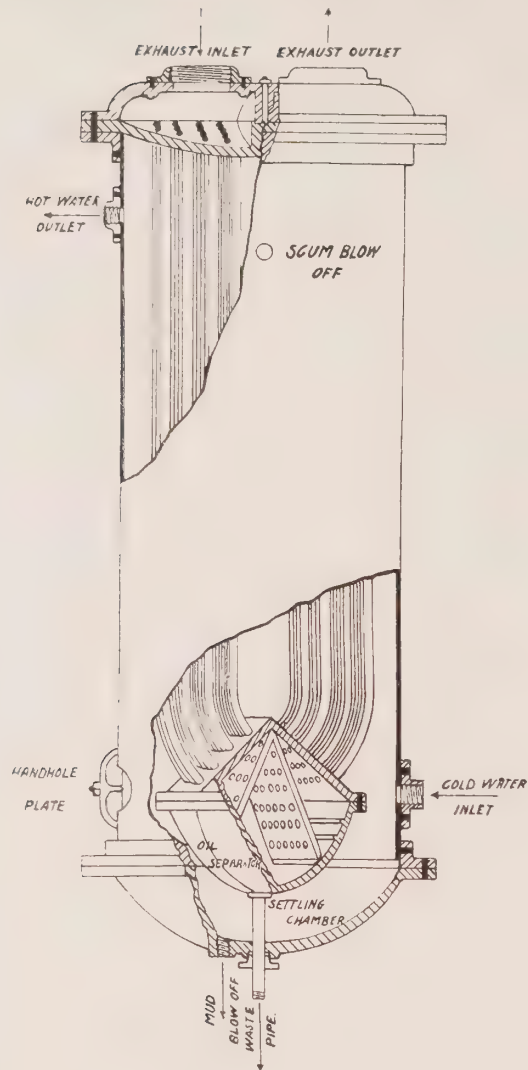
Steam Tube Type of Closed Feed Water Heater. (In this type the steam passes through the tubes).
